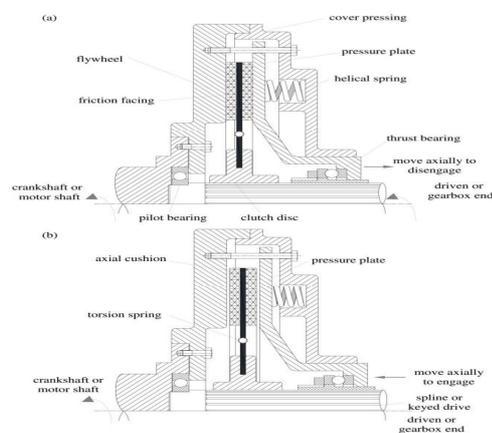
Engagement and disengagement in single-disc clutch system (a) Engaged, (b) Disengaged
